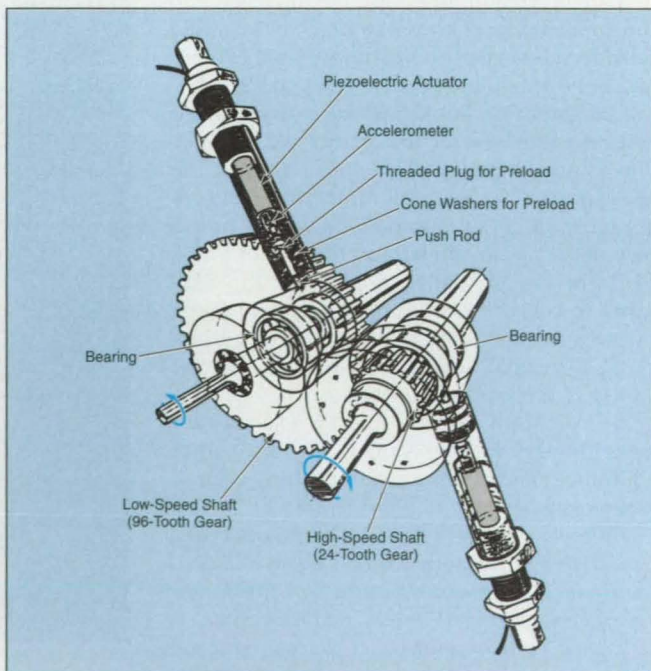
Piezoelectric Actuators Generate Forces to counteract gear-mesh vibrations. The off-center mounting scheme makes the actuator force collinear with the gear-mesh force.
